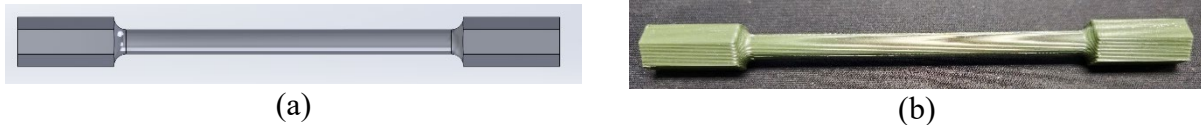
Additively manufactured specimen: (a) CAD model; (b) Final specimen
